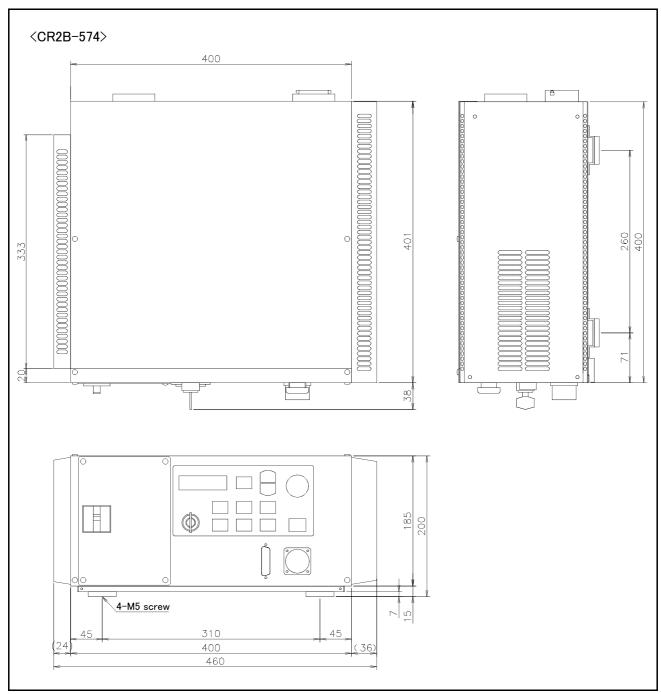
Outside dimensions of controller (CR2B-574 controller)
